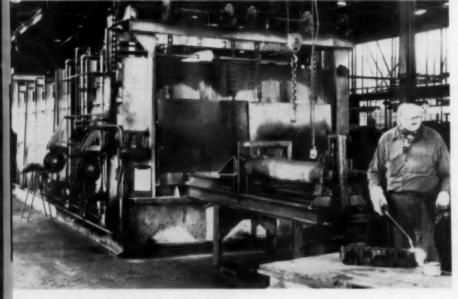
Counterflow Furnace for Preheating Automotive Castings Prior to Welding of Defects and Annealing of the Repaired Items
